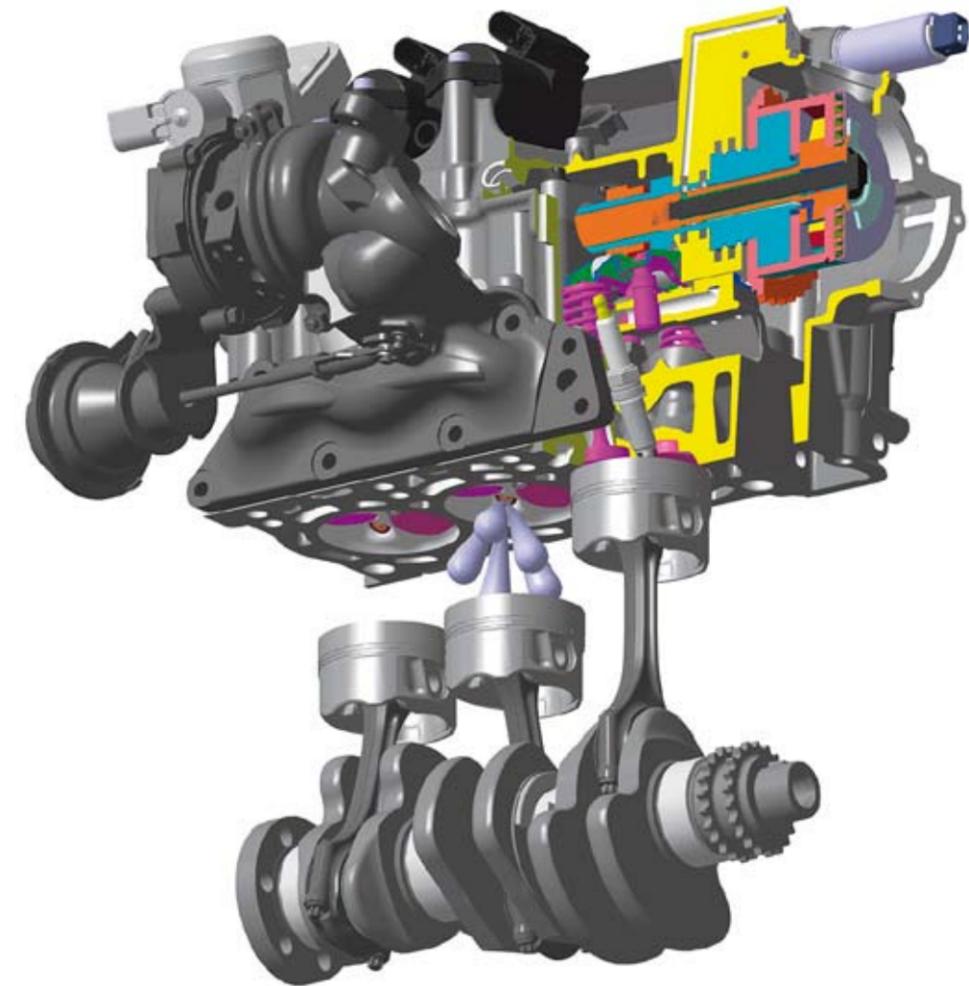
A small direct-injection turbocharged version of a three-cylinder gasoline powertrain equipped with a SOHC, two valves per cylinder
